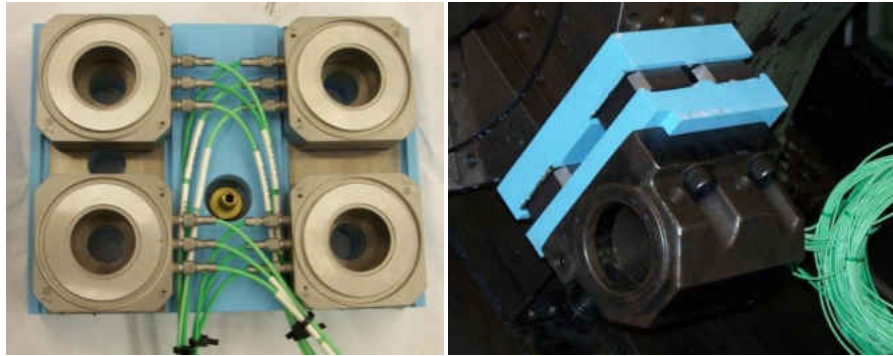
(Left) Force sensors and hose for fluid passage (Right) Mounted assembly
